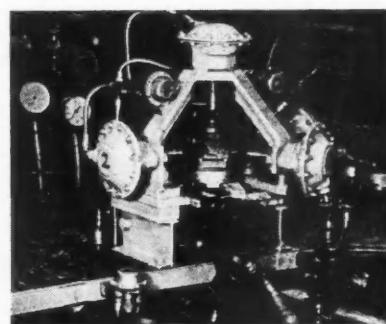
Air-operated fixture used for making pneumatic inspection tests on a treadle type air brake valve assembly.
